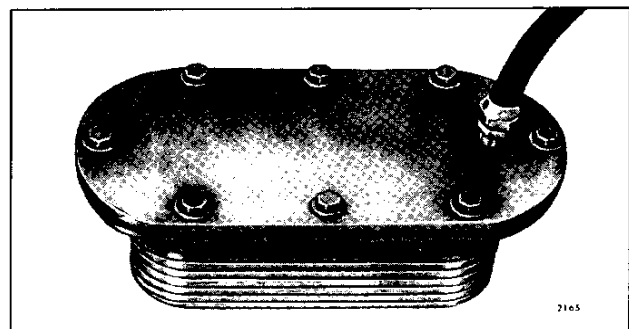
Preparing Oil Cooler Core for Pressure Test
